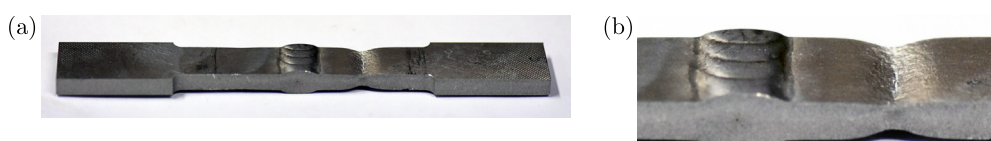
6005 T6 aluminium alloy specimen with weld after tensile test.
